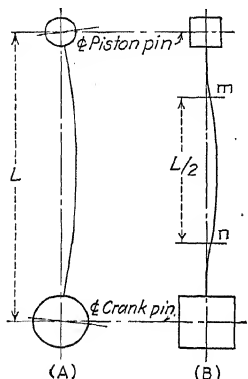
Connecting-rod deflection (exaggerated). (A) In the plane of rotation, (B) in the plane of the piston and crankpin axes.
